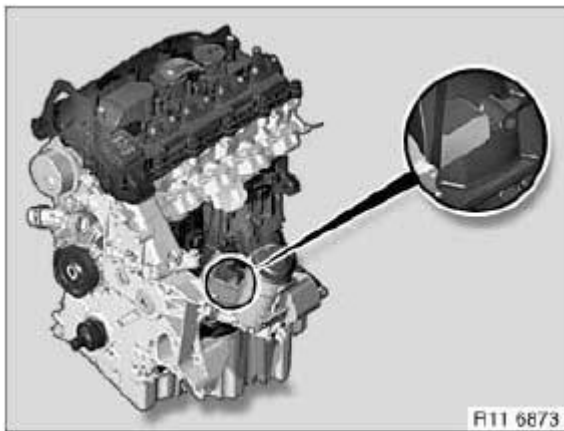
Locating Engine Mount Screws And Ground Wire
